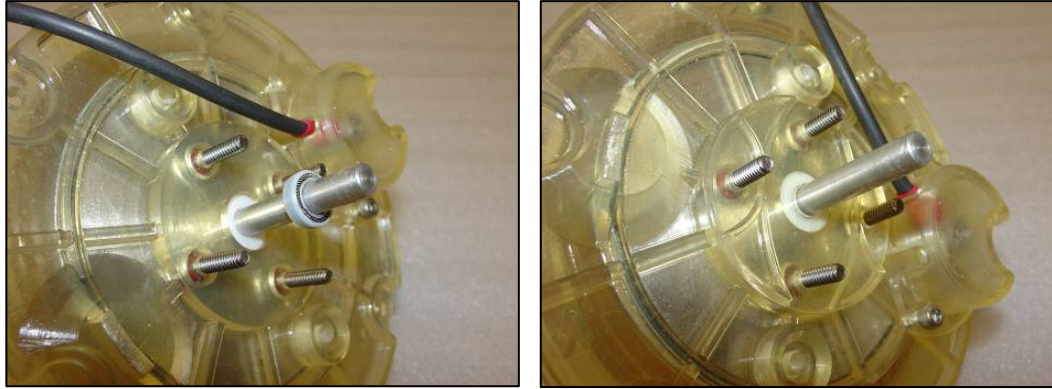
Cover assembled to Electrode (L) Electrode Inserted into Case (R)
